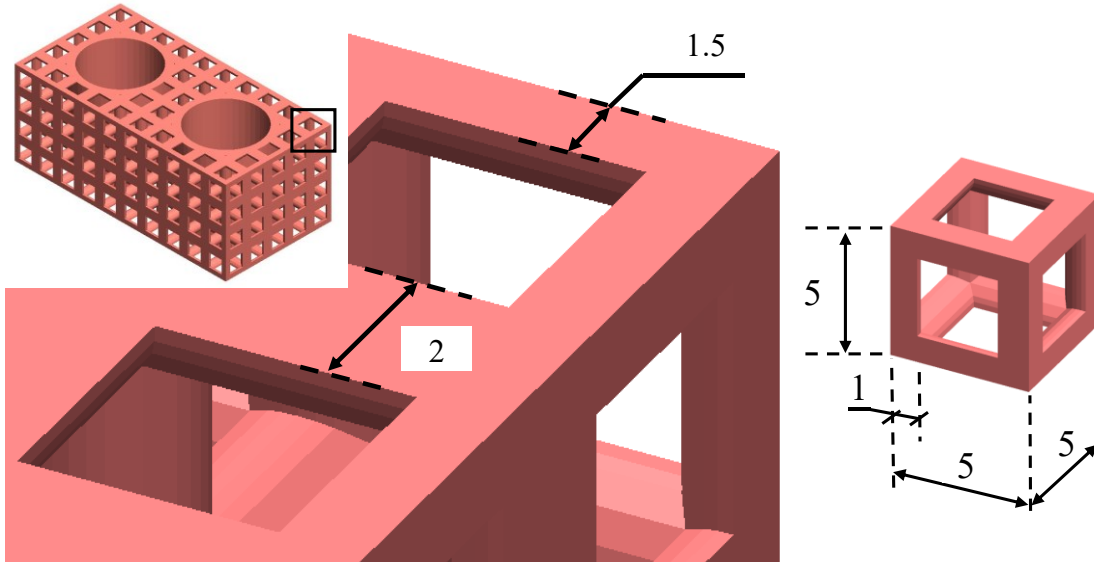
Zoomed-in view of the hole component of the assembly GBTA to show important dimensions. A unit cell of the simple cubic lattice used in the assembly GBTA is also shown on the right. Units: mm.
